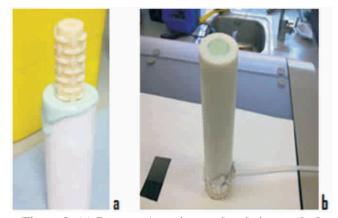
(a) Reverse-Auxetic template being pushed inside a TEFLON tube, and (b)silicone elastomer casted onto an antipode-Auxetic template inside the TEFLON tube
